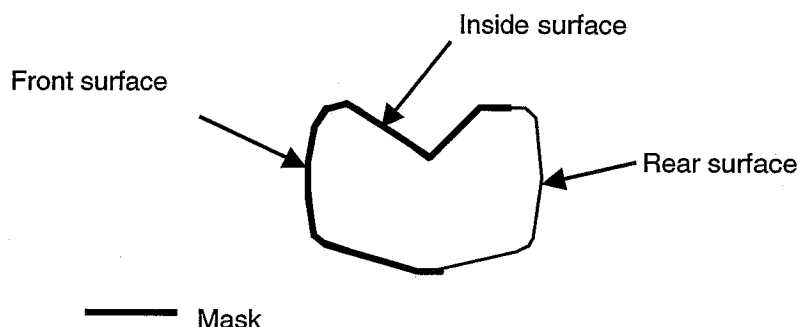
Cross-section of rim showing those parts of the rim which need to be masked
